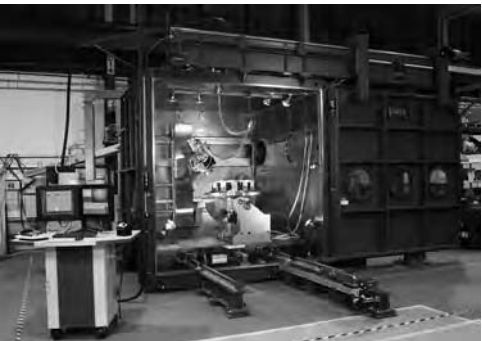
Large-chamber, low-voltage electron beam welding system with movable gun. Courtesy of Sciaky, Inc.
